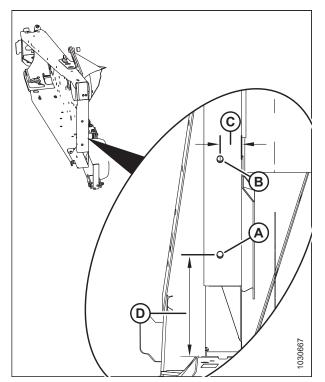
Jack Mounting Hole Locations, View from Rear – FD75
